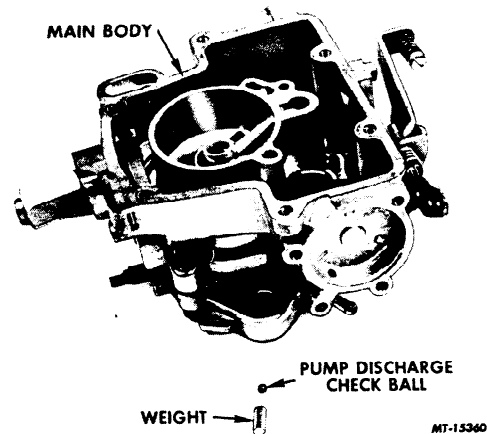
Remove or Install the Pump Discharge Ball and Weight
